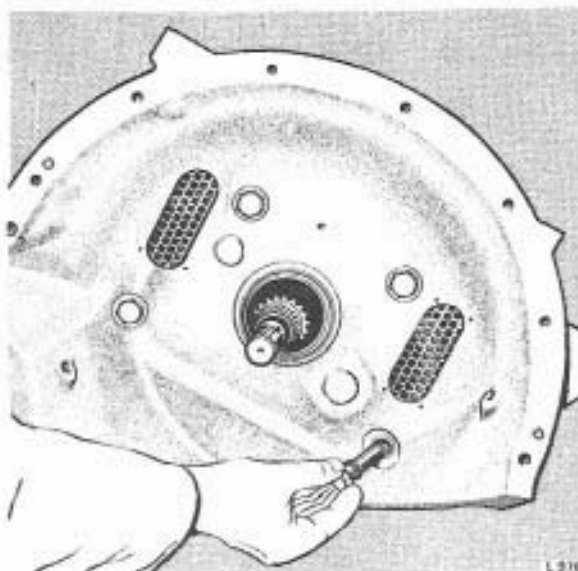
FITTING THE BELL HOUSING SHORT SETSCREW
